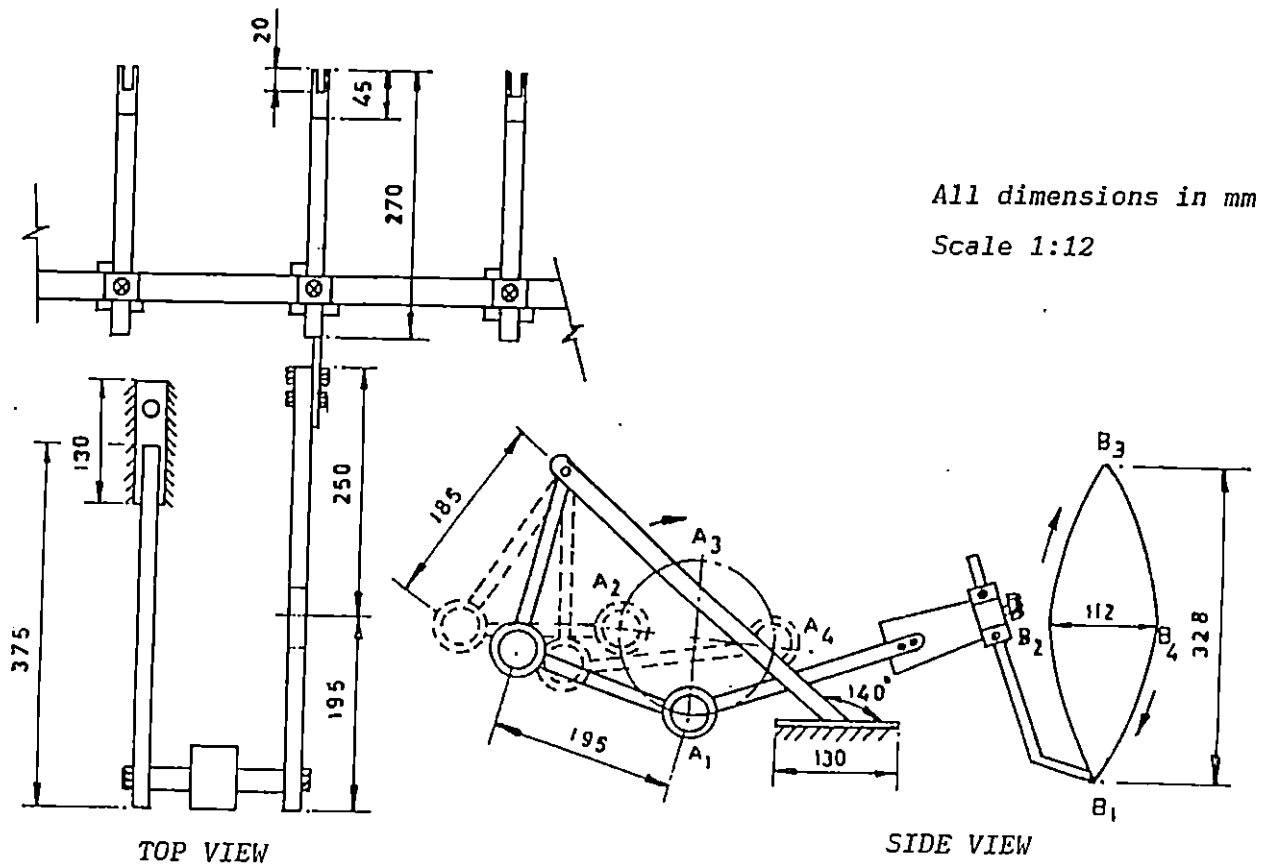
FOUR-BAR MECHANISM FOR PICKER ARM ASSEMBLY
